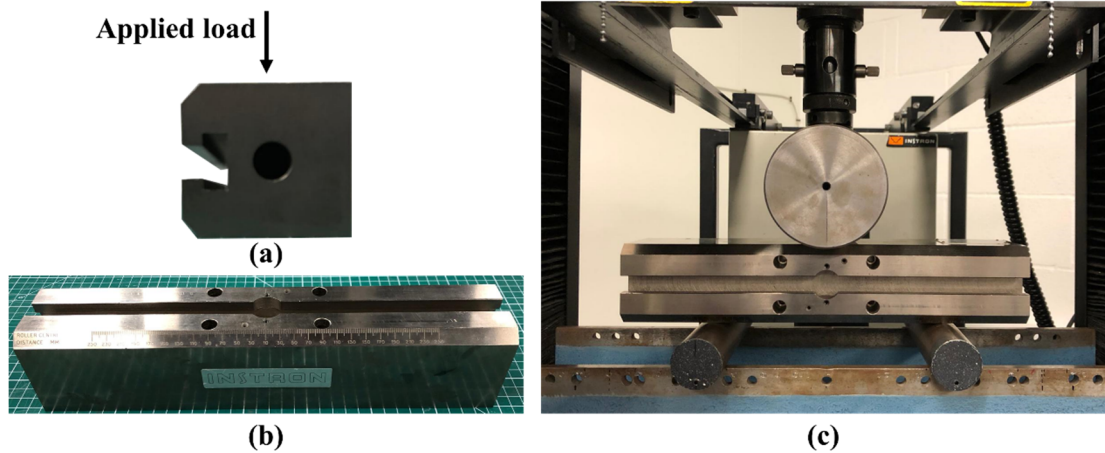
(a) Cross-section and (b) three-dimensional view of steel fixture; (c) Fixture in three-point flexure setup.
